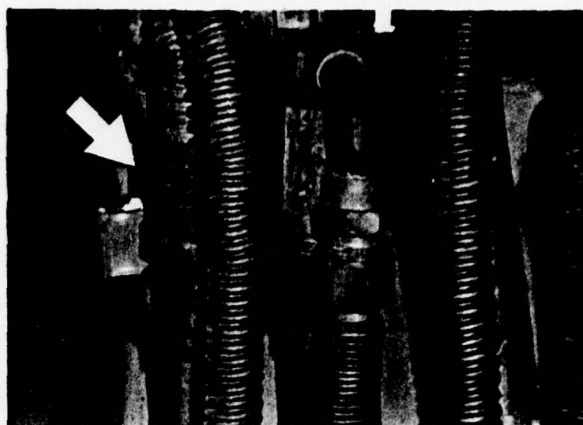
O₂ Charging Cart - Fitting Corrosion
